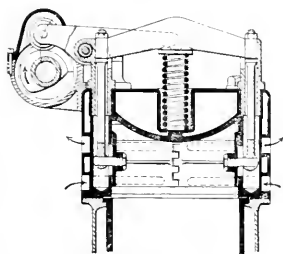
ONE CYLINDER OF HOWARD CUFF-VALVE ENGINE
